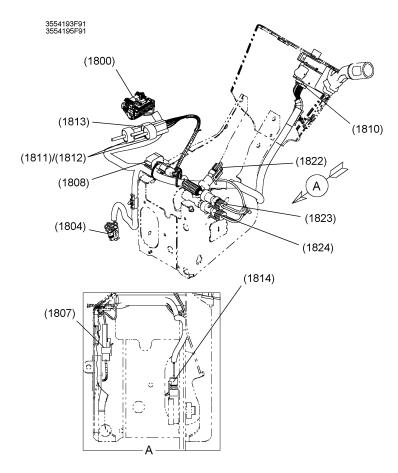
Primary Air Gauge Transducer Location (Steering Column Support View)
